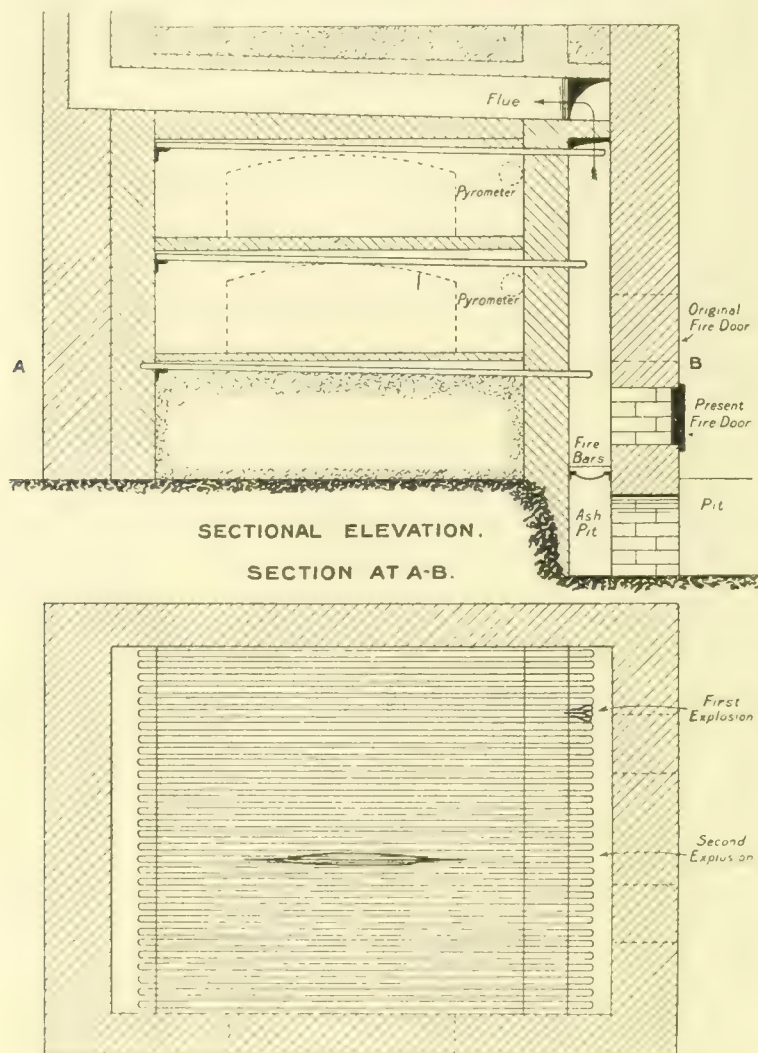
VIEWS OF STEAM OVEN, SHOWING POSITION OF TUBES WHICH FAILED.
